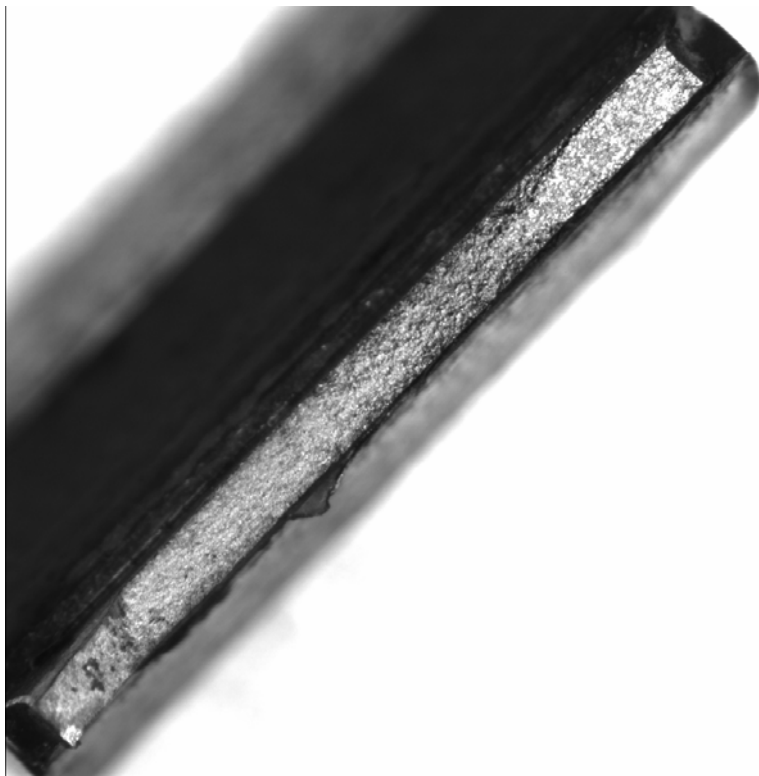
Fracture Surface of Specimen 5773.
